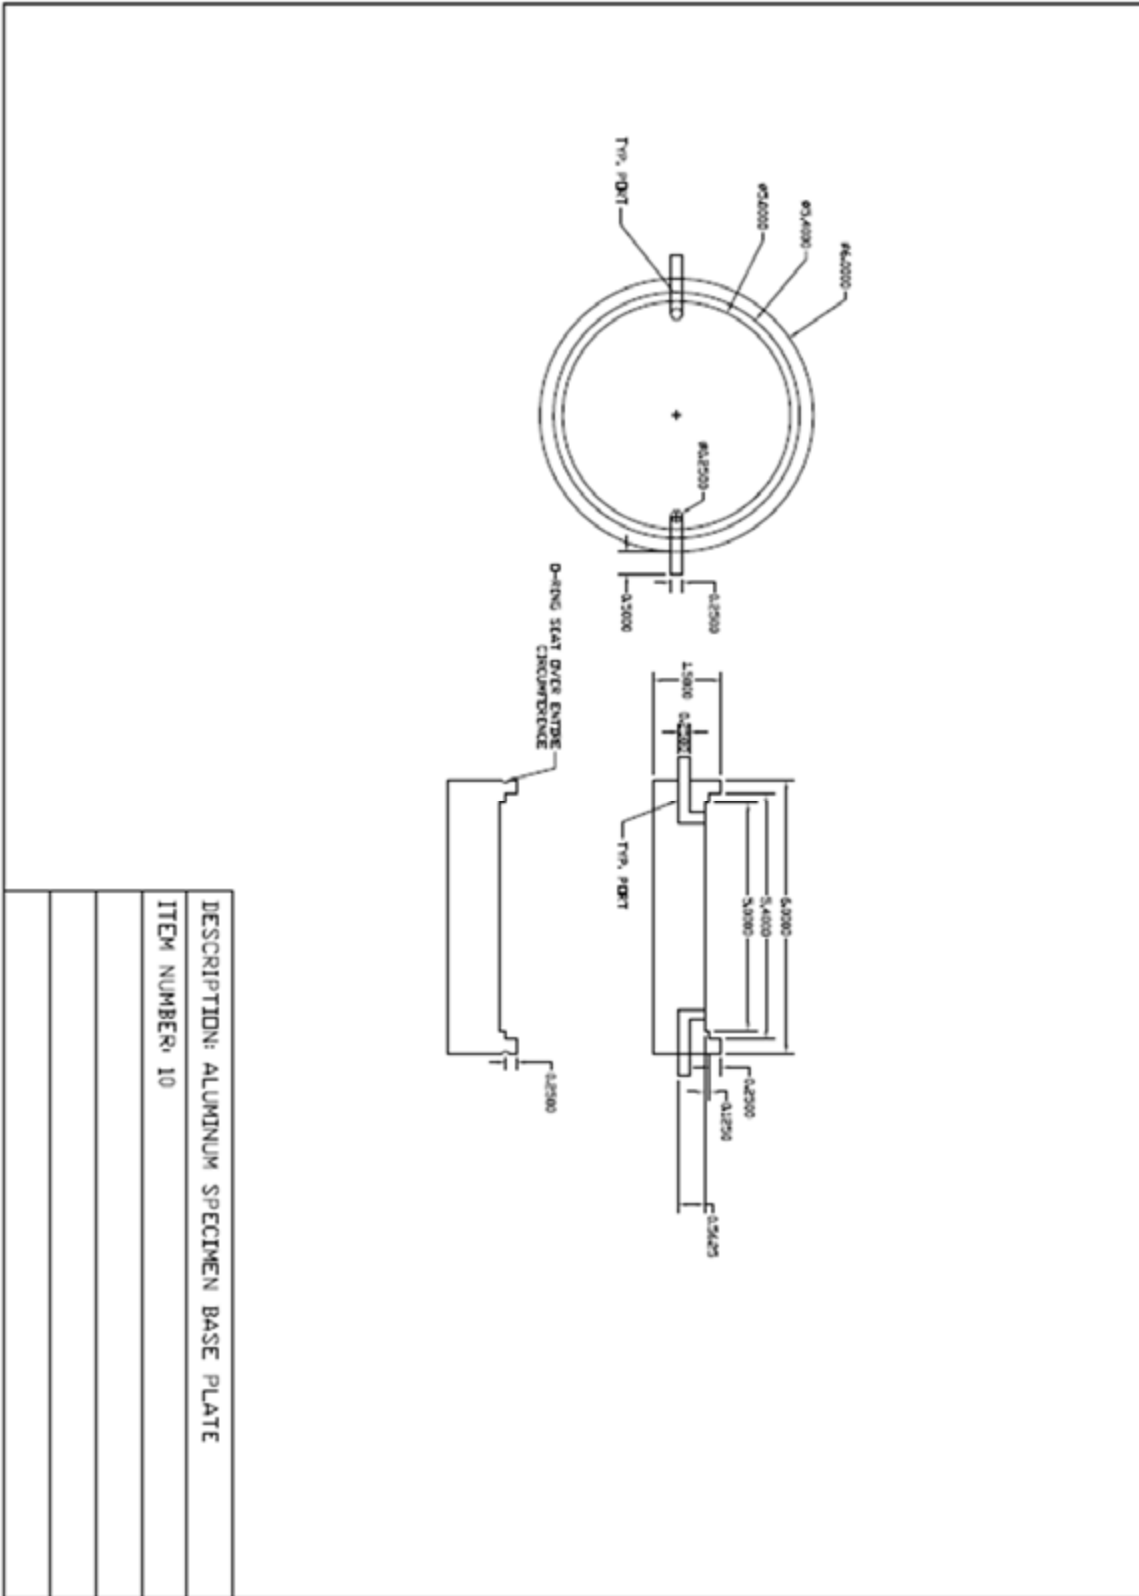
Aluminum specimen base plate for frost-heave and thaw-weakening test
